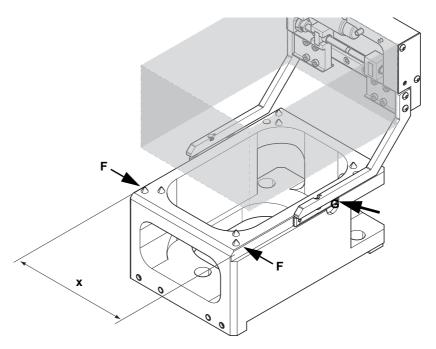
Aligning the gripper fingers with the milled shoulder
